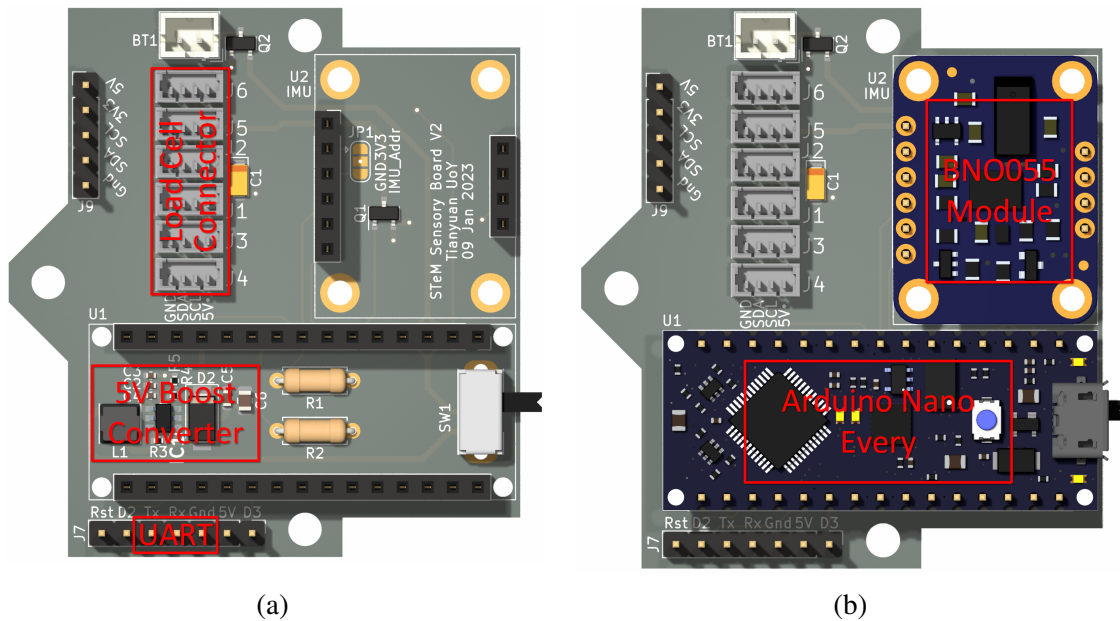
The front view of the sensory PCB without and with the microcontroller and IMU modules populated. The dimension of the board is  $51.8 \times 55.6 \times 17.8$  mm.
